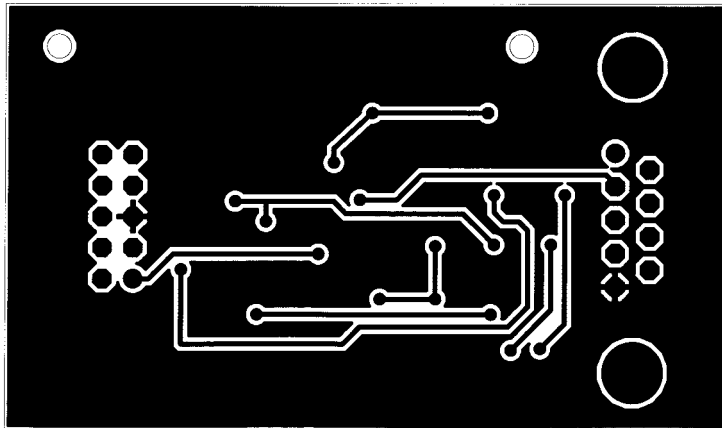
Universal BSL Interface PCB Layout—Bottom
